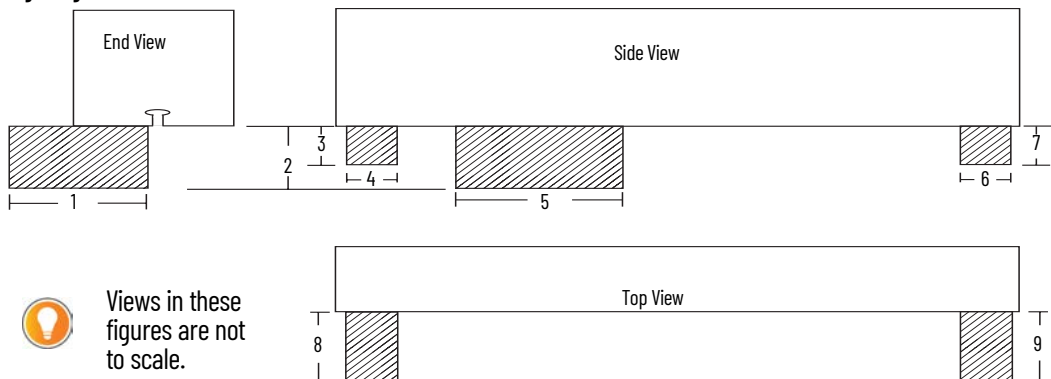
QuickStick 150 Cable Connector Mounting Clearance
